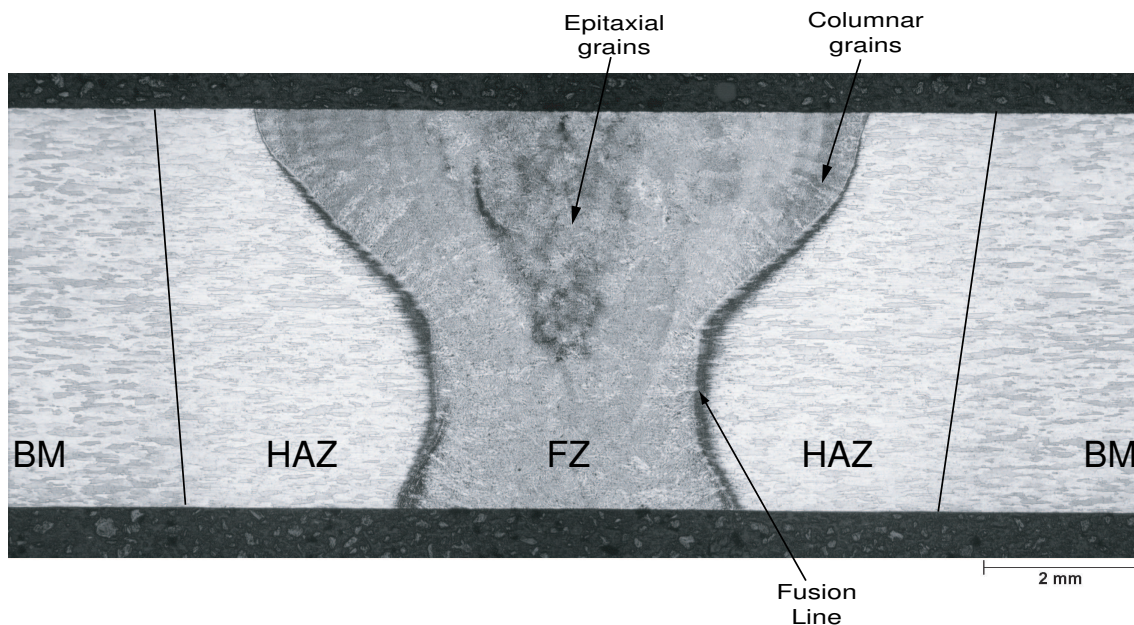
Cross section of the Al6056 T78 laser beam weld
